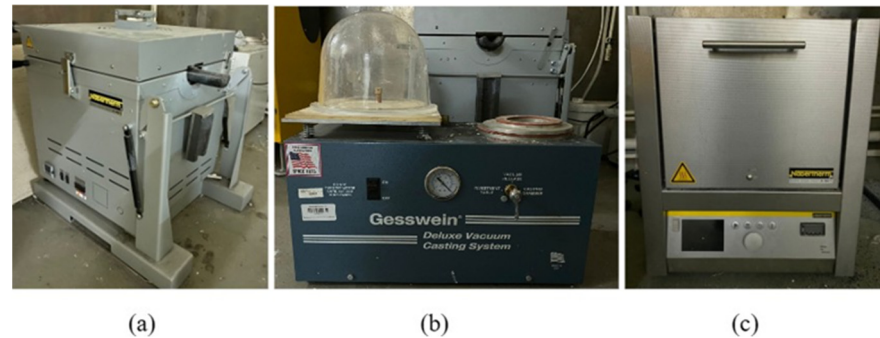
Equipment used for casting (a) metal melting furnace; (b) IC vacuum machine; (c) muffle kiln.
